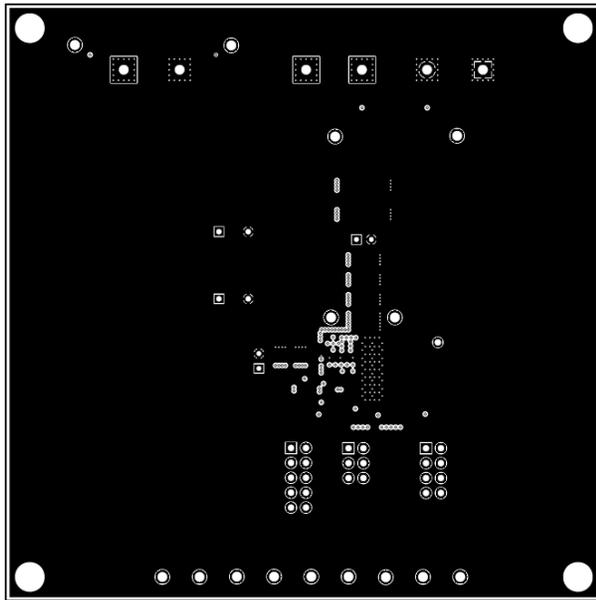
through Figure 8-8 display the EVM PCB layout images.
